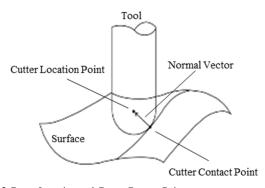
Cutter Location and Cutter Contact Points شکل 2 نقاط موقعیت و تماسی ابزار
